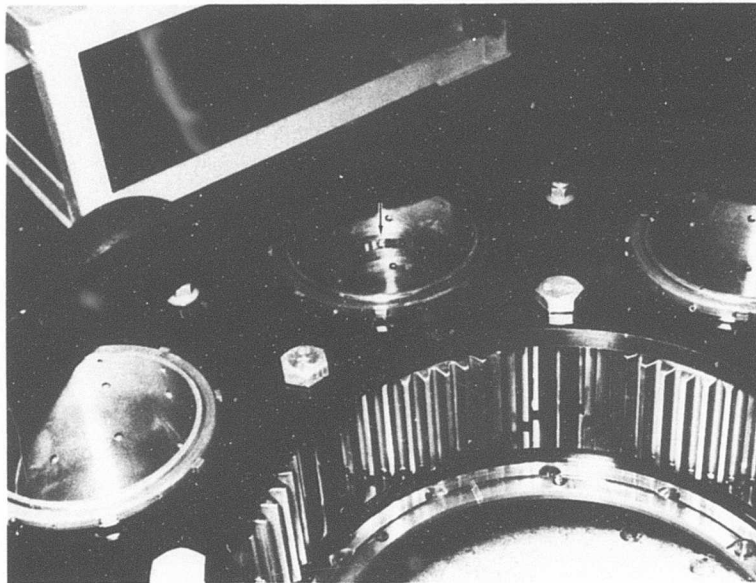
First-Stage Planetary Pinion Roller Bearing Inner Race Temperature Indicators.
